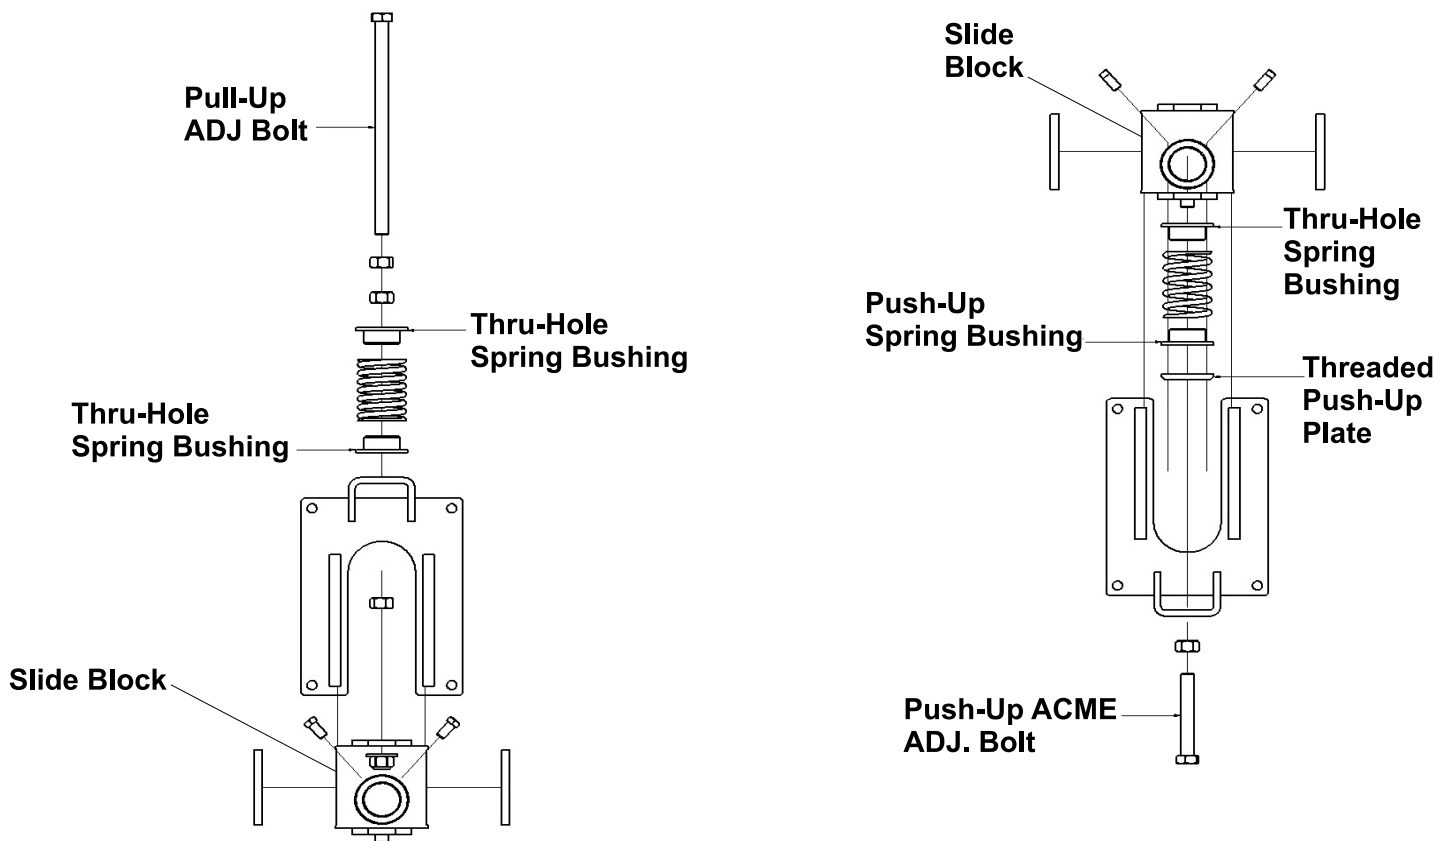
Duo-Spring Tensioner Assembly Pull-Up (left) and Push-Up (right) Tensioners
